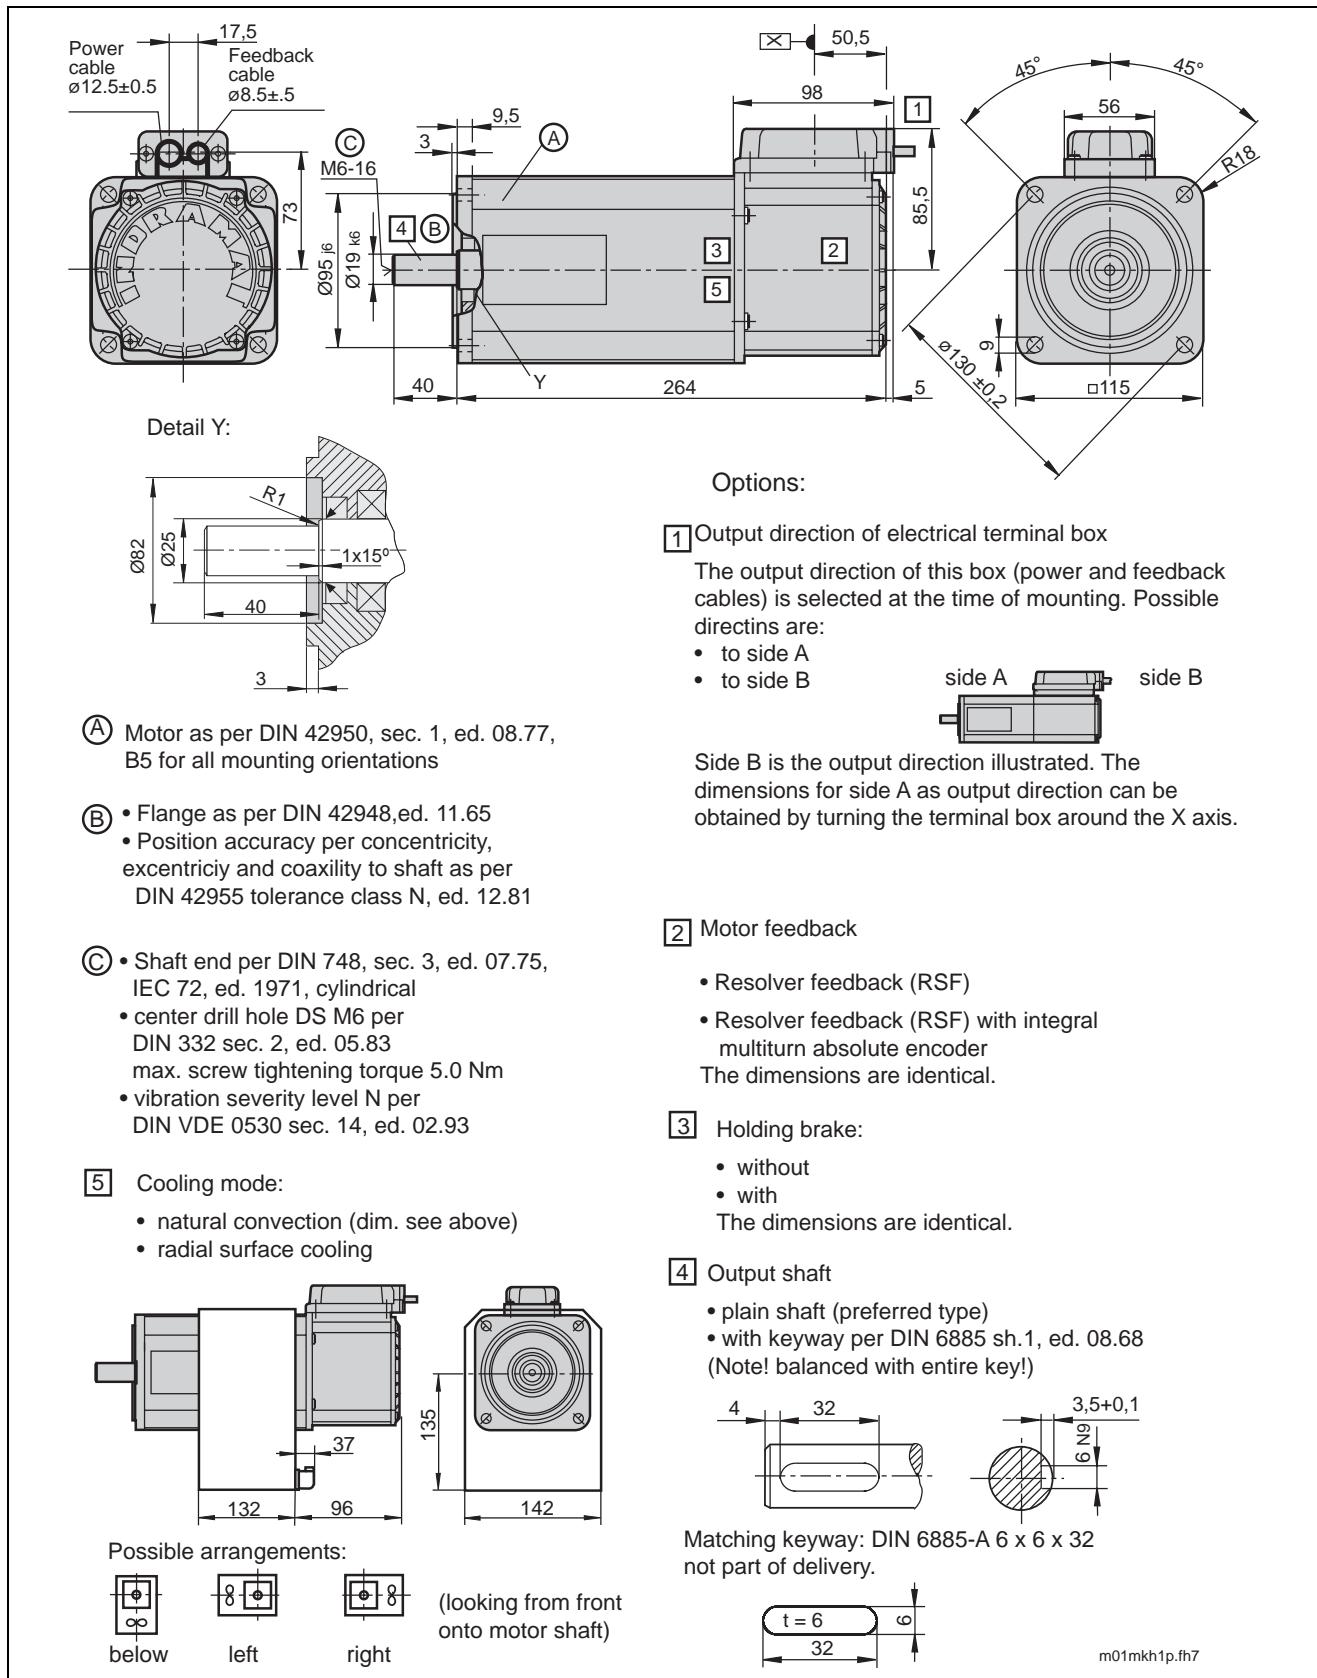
Dimensions sheet MKD071B-035, MKD071B-061 (with terminal box)
